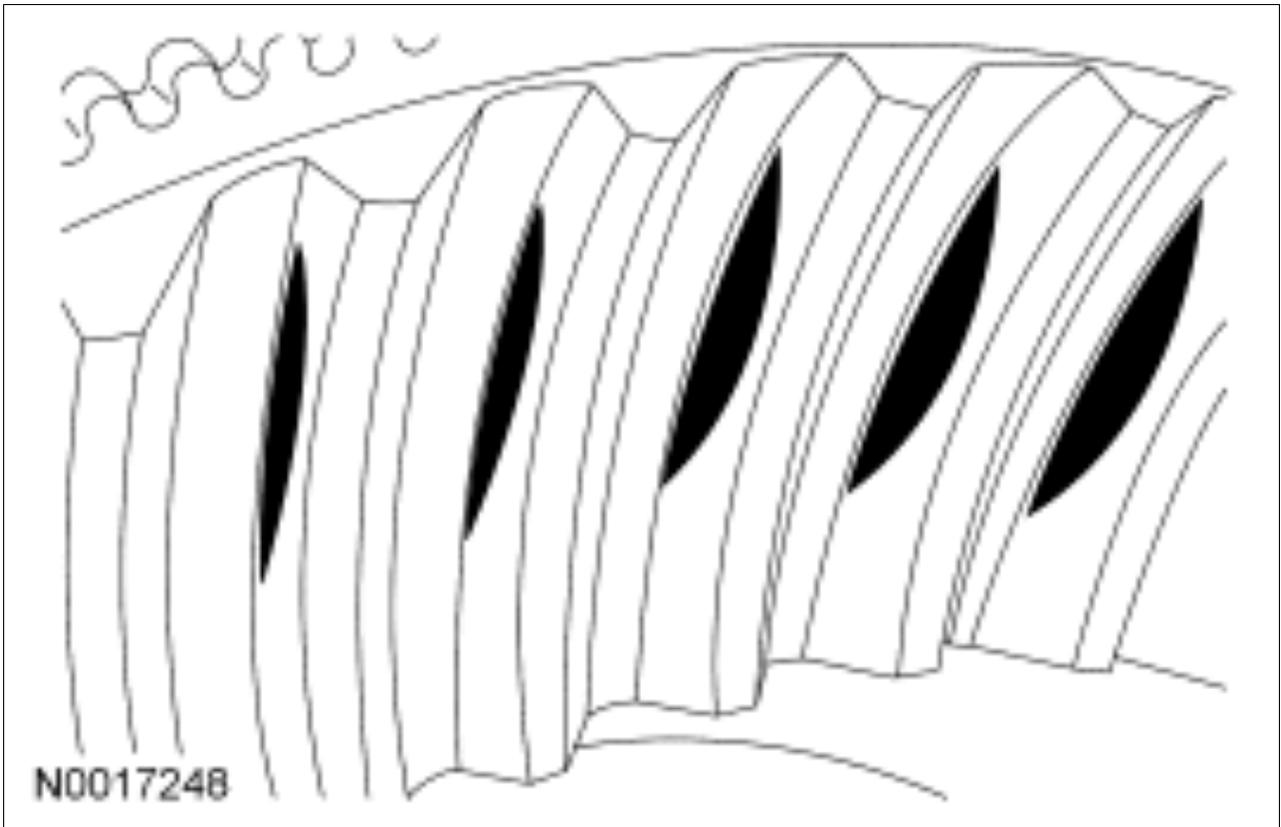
Identifying Low Contact Pattern (Contacting More Toward Heel)
